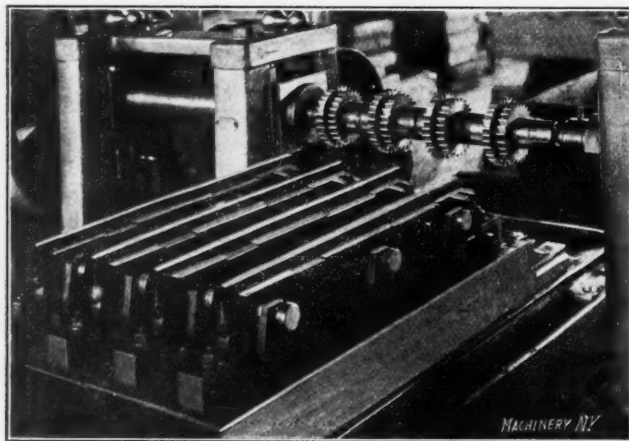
View of Jig on Milling Machine, showing Clearance between it and the Cutters
